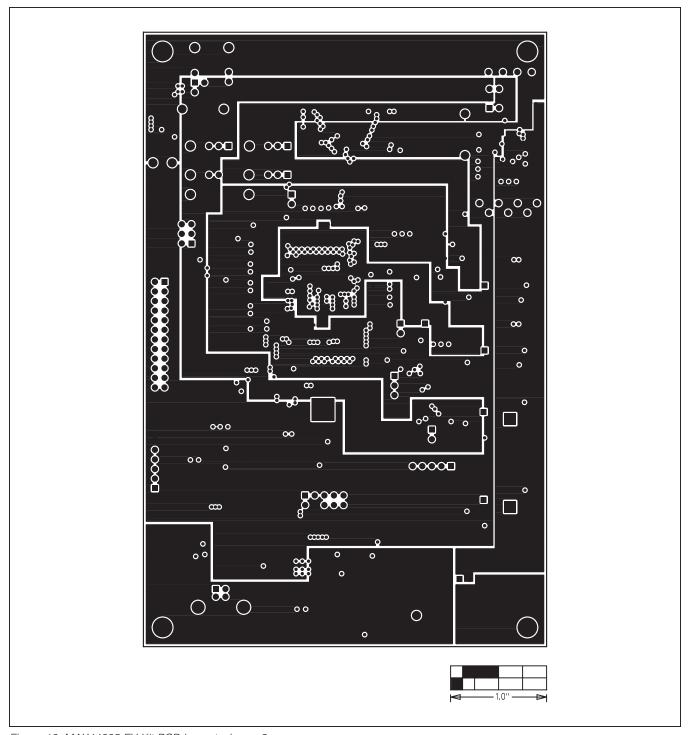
MAX44005 EV Kit PCB Layout—Layer 3
